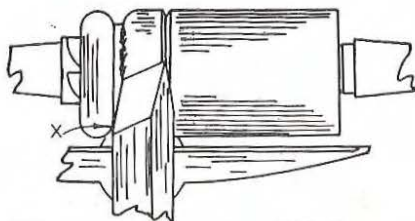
Tool will rub at "X" if tool is not drawn forward as work progresses.
